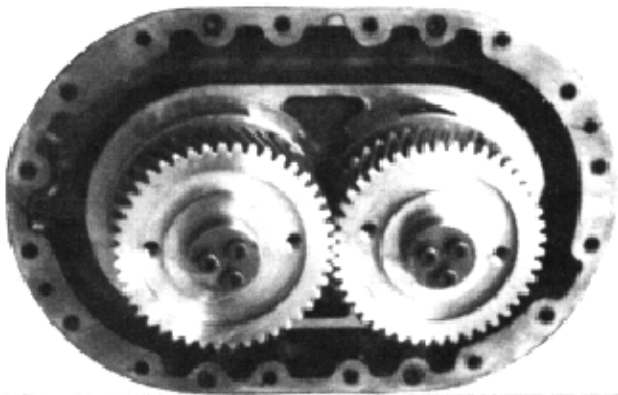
LOCATION OF TIMING GEAR BOLTS
